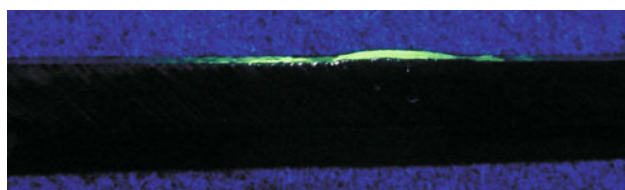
Cross-section photograph of the coating on a welded seam on AZ31. The AZ31 sheet which appears black in the photograph has a thickness of 6 mm. The coating was produced using a suspension of doped magnesium fluoride nanoparticles (MgF₂:Ce³⁺/Tb³⁺). The presence of the film is confirmed by the bright green area appearing under irradiation with UV light (254 nm) (Color figure online)
